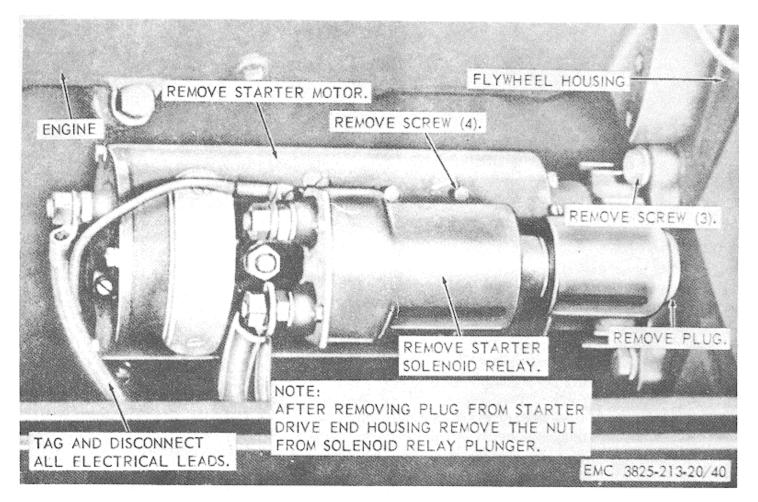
Plow and carrier engine starter assembly and solenoid relay, removal and installation.
